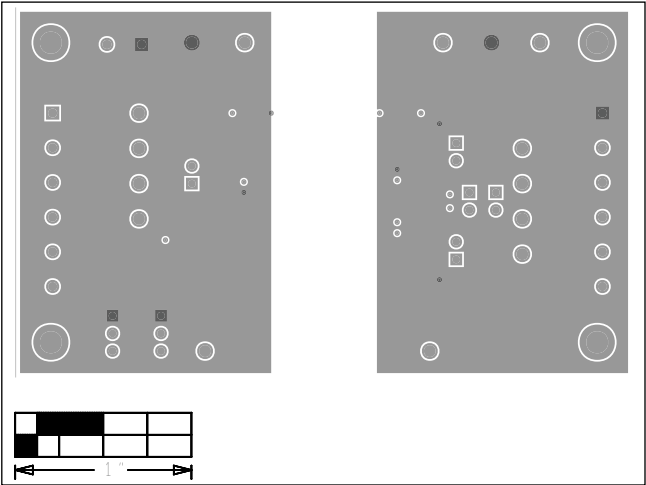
MAX148X2 EV Kit PCB Layout—Internal Side (Power)
